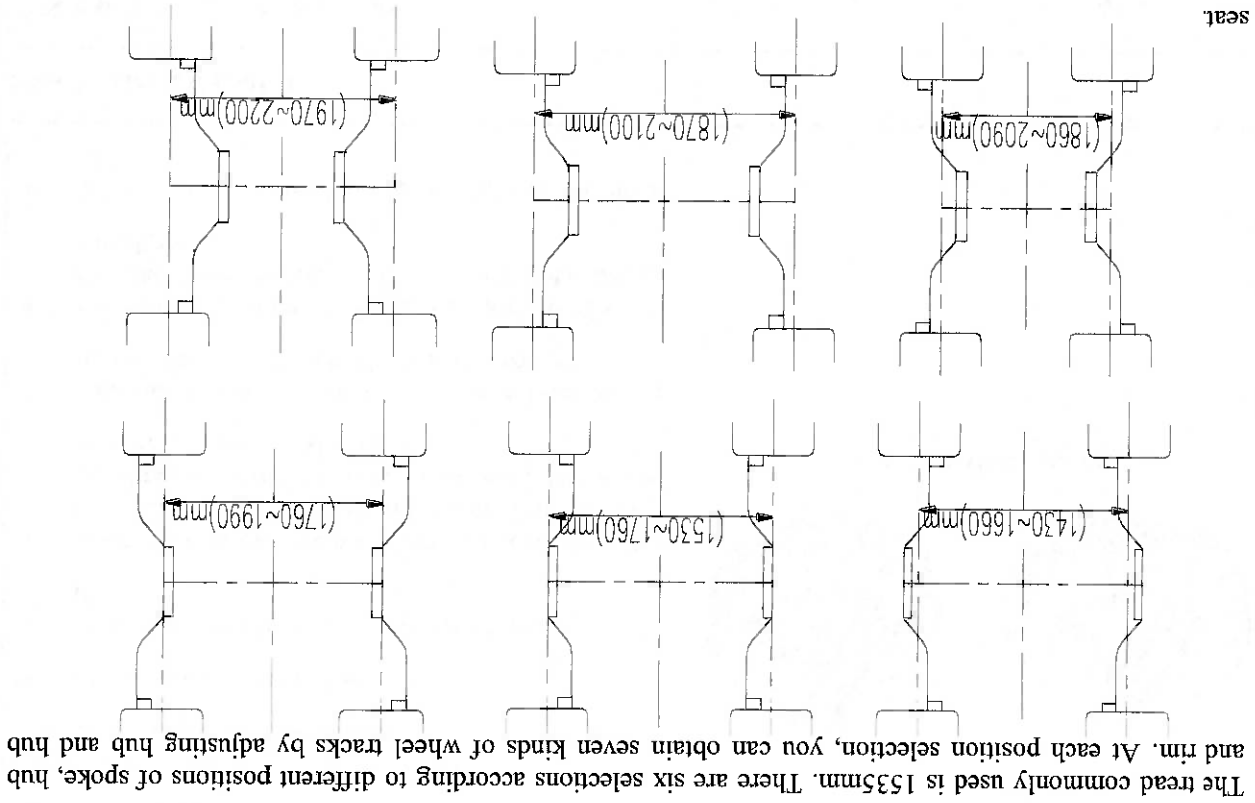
Rear wheel track adjustment as to stepless adjustment type.
